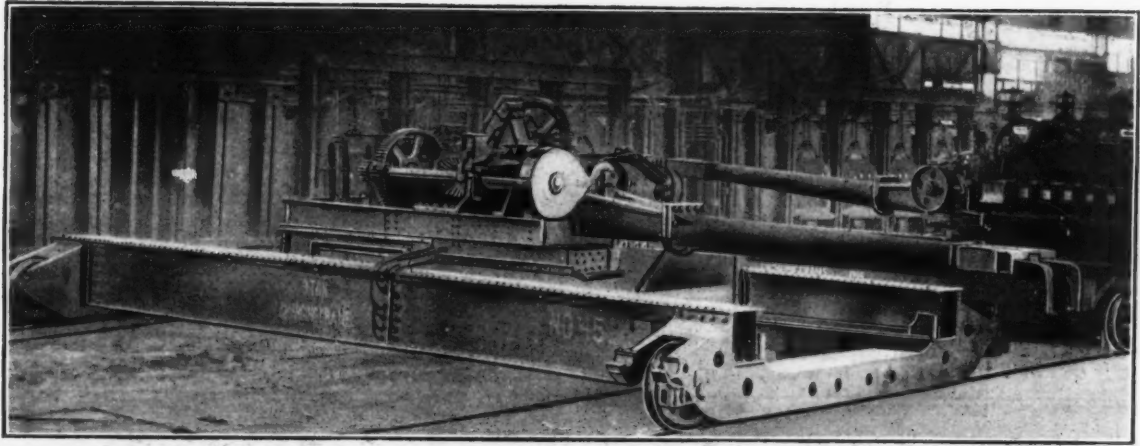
Slab Charging and Drawing Machine for the 72-In. Plate Mill.
